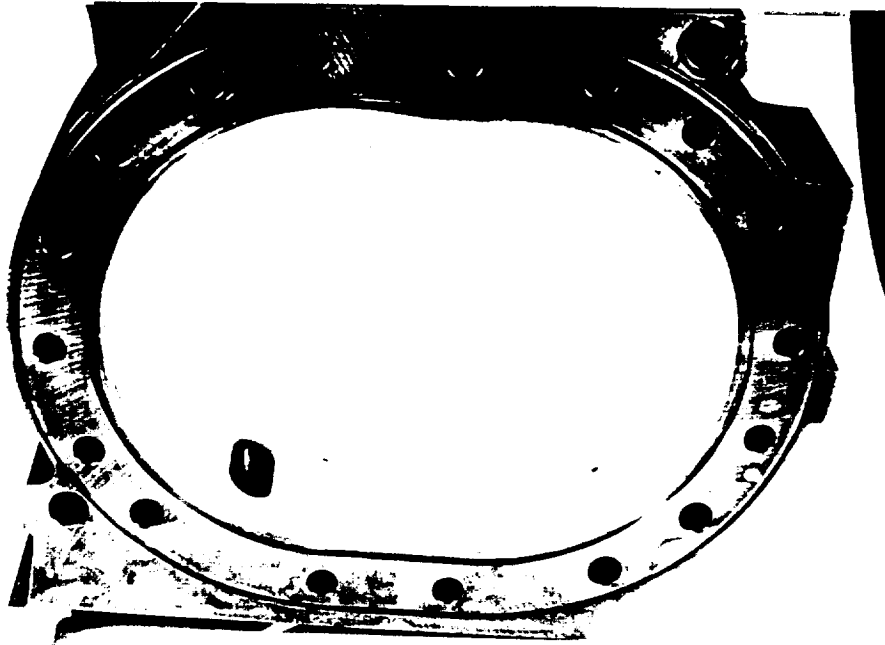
Failed Tribaloy 800 Coating on Mazda Stock Aluminum Rotor Housing.
